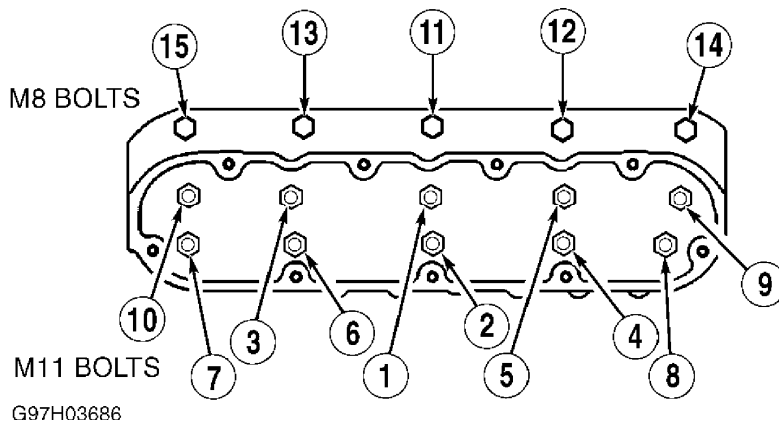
Cylinder Head Bolt Tightening Sequence
